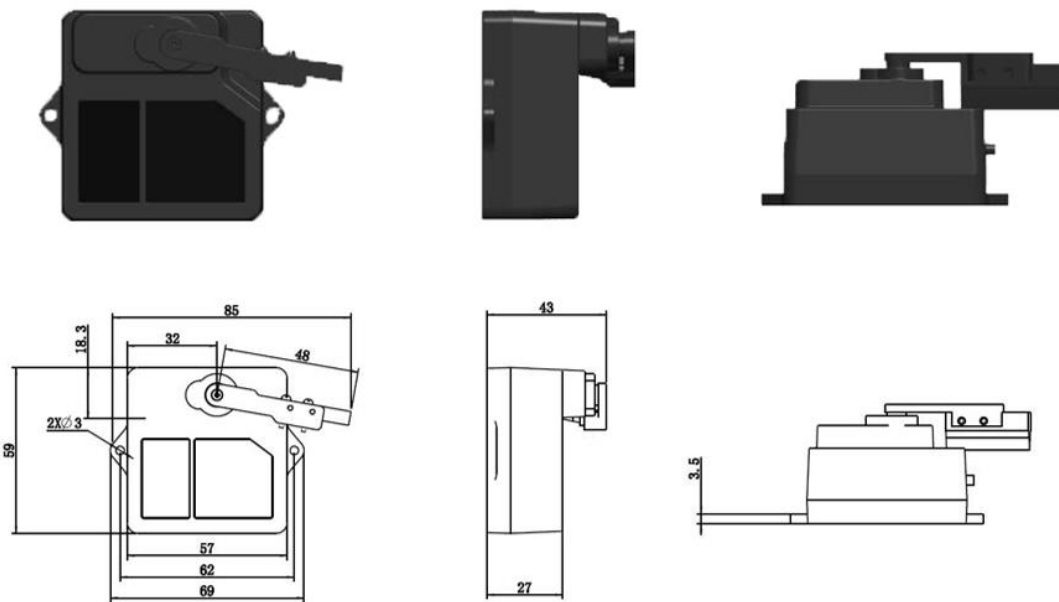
Dimension of TF02-Pro-W (Unit: mm)
